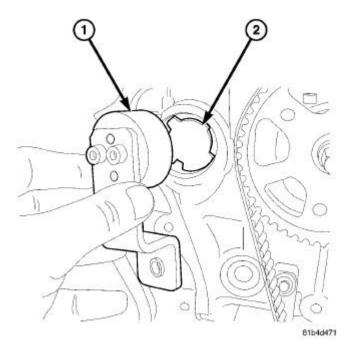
Camshaft Locking Tool Courtesy of CHRYSLER LLC
